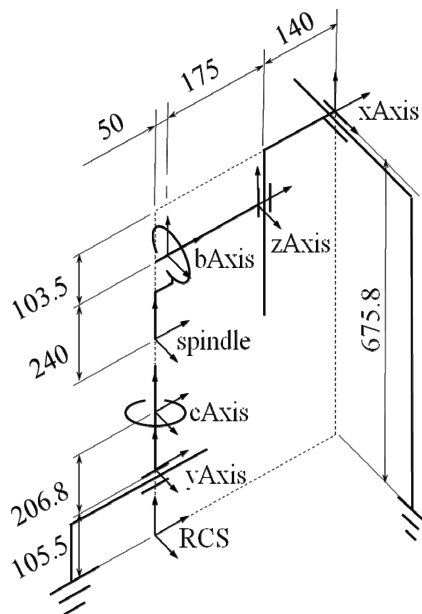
Schematic diagram of 5-axis machine tool (unit: mm)
